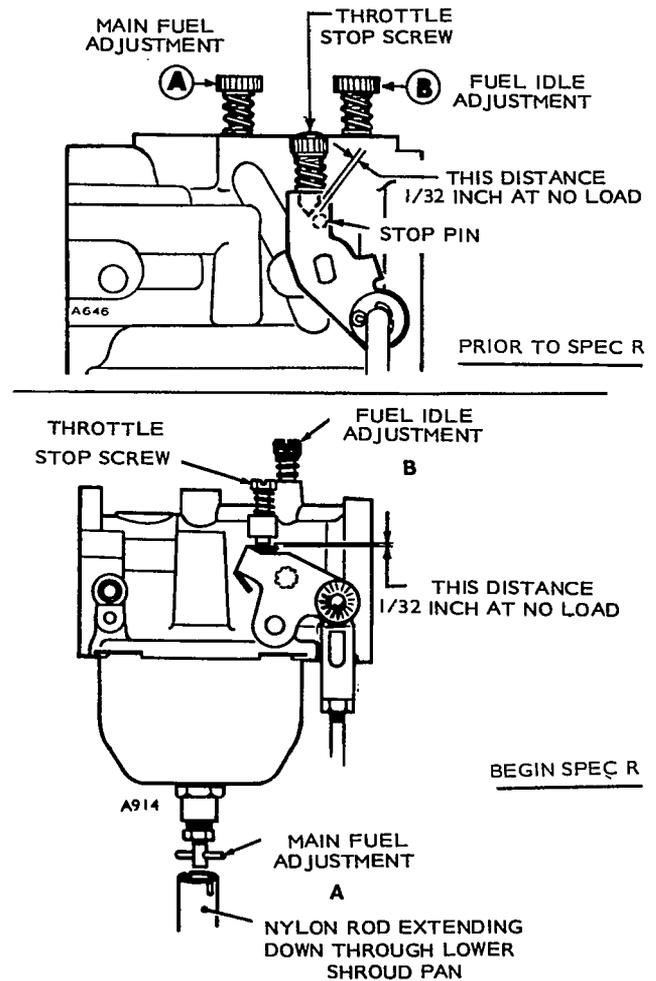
ADJUSTING GASOLINE CARBURETOR
